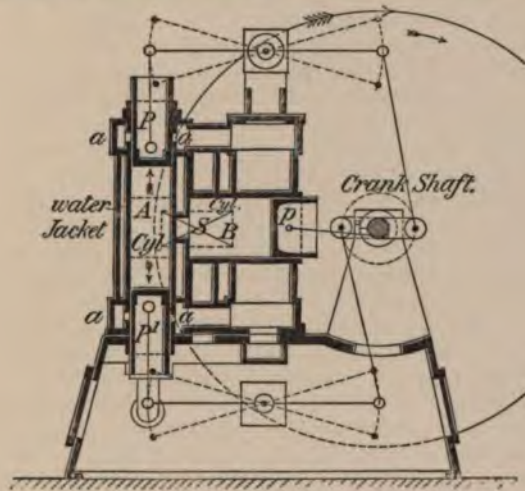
Sturgeon Gas Engine—Sectional Elevation.
